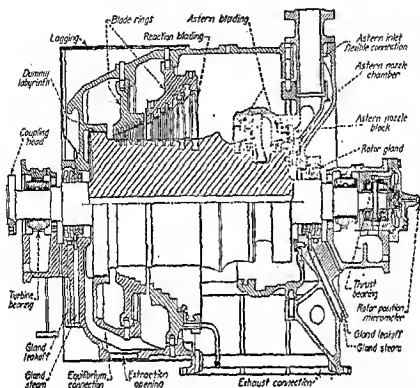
Typical cross section of a Westinghouse low-pressure turbine.
